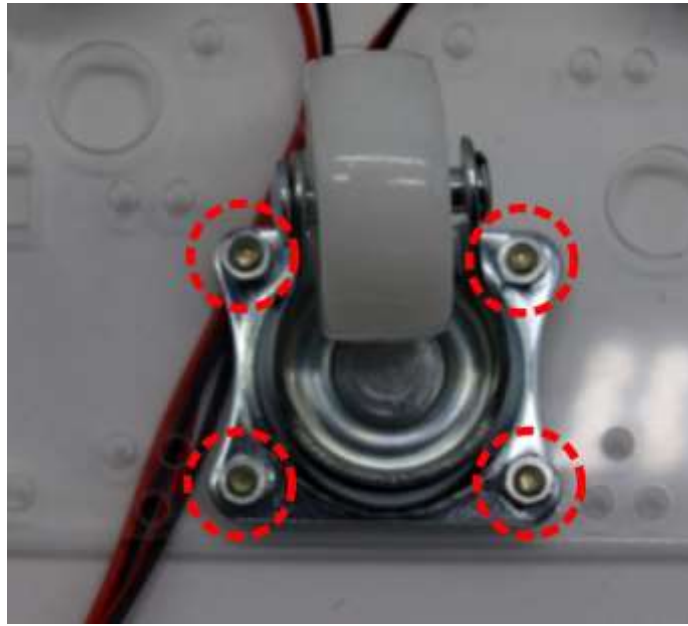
13 : Nuts are placed on the lower parts of the chassis.
